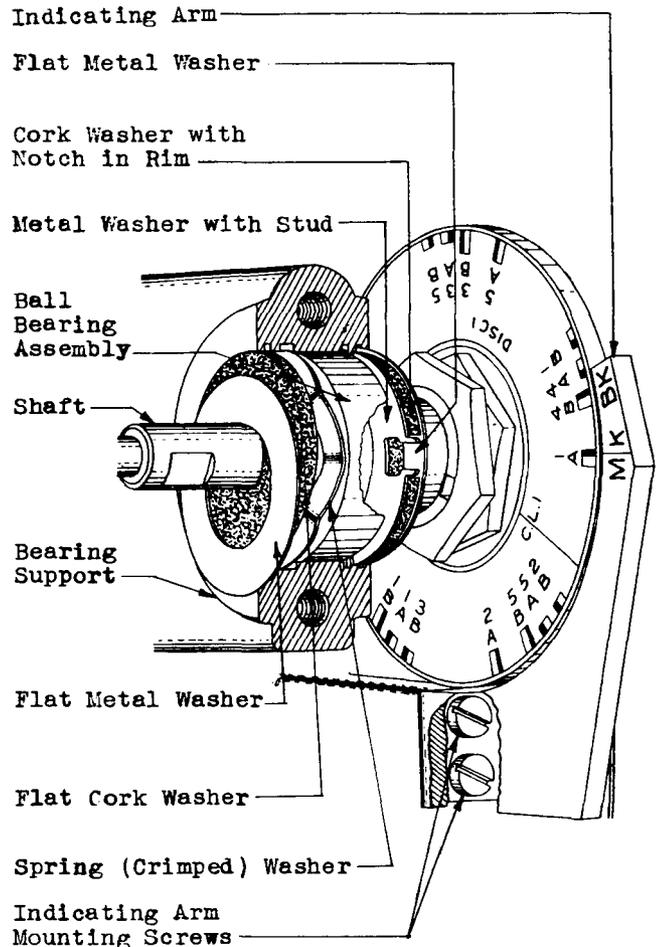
Bearing Assembly at Left-Hand End of Shaft
